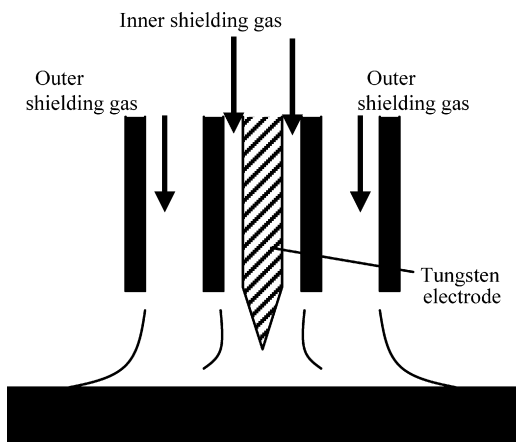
Schematic diagram of double shielding torch for GTA welding.
